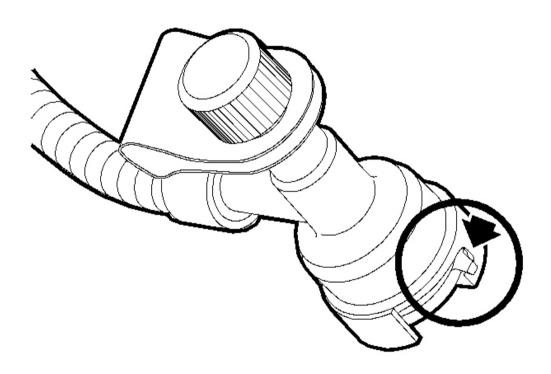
View of EVAP Purge Solenoid Into The Retaining Bracket Courtesy of GENERAL MOTORS CORP.
